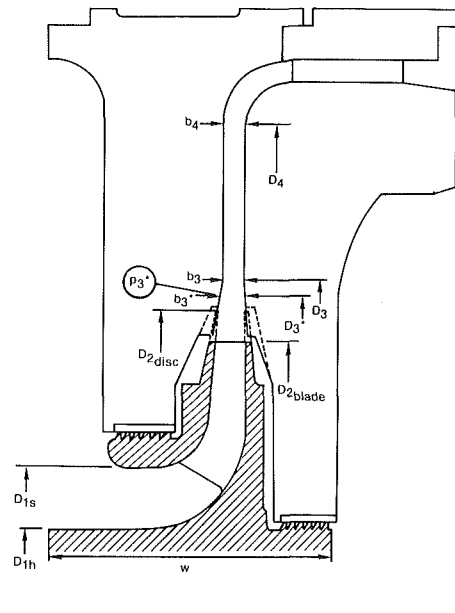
Geometric nomenclature of a compressor stage with trimmed impeller
